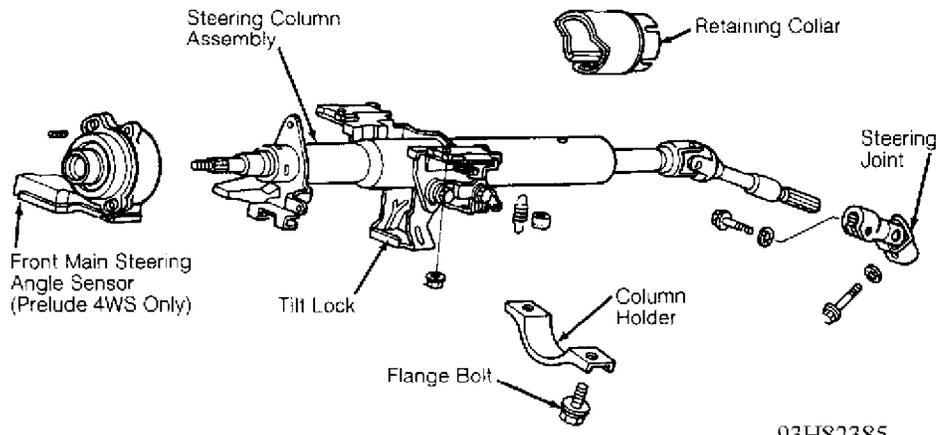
Exploded View Of Tilt Lock Assembly (Typical)
